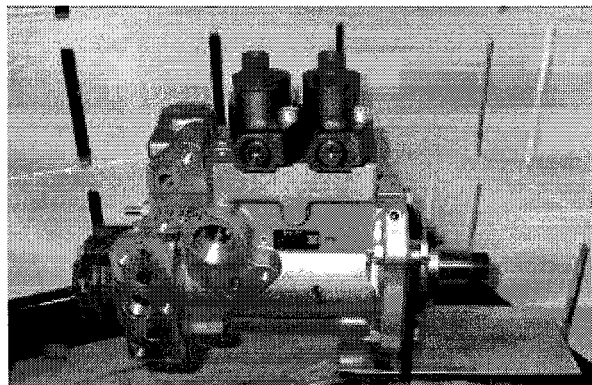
High Pressure Fuel Pump In Holding Fixture
